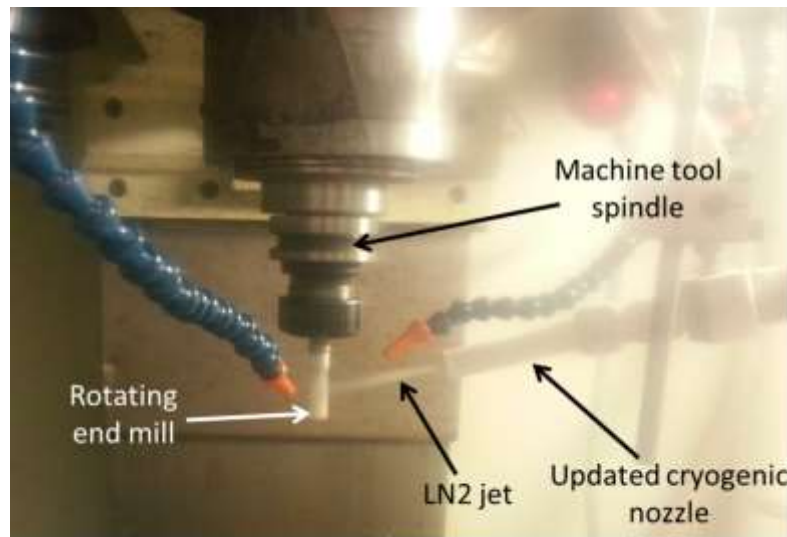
Successful testing of the updated cryogenic cooling nozzle after installation to the machine tool and spraying LN2
